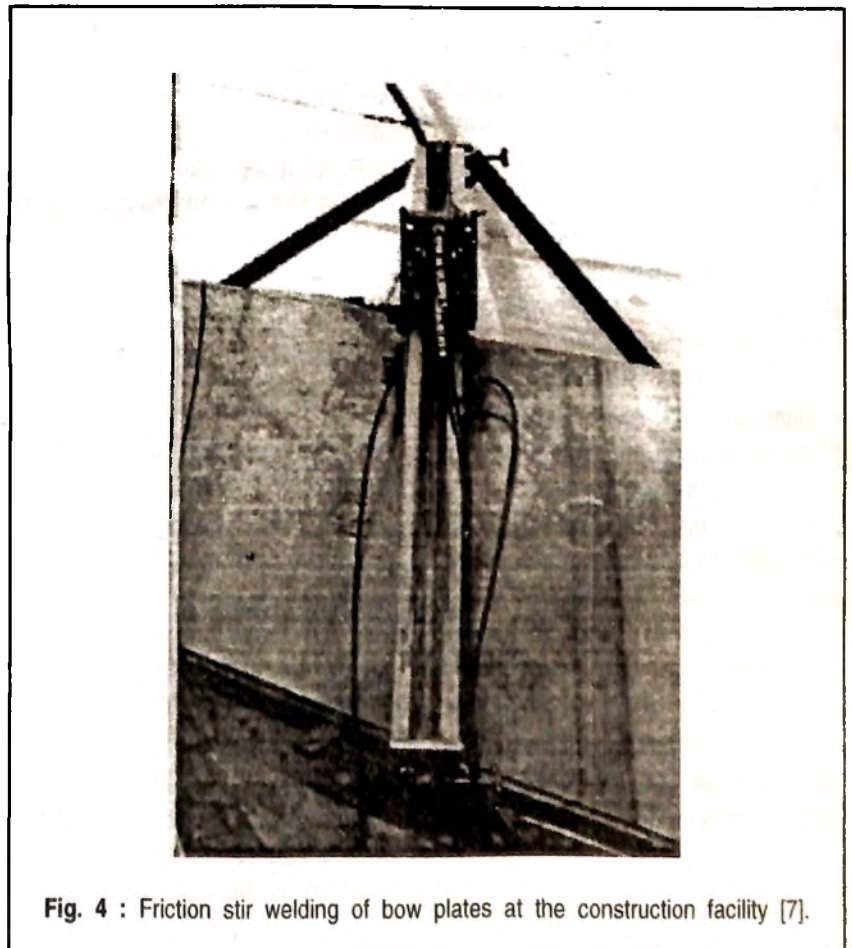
Friction stir welding of bow plates at the construction facility [7].
